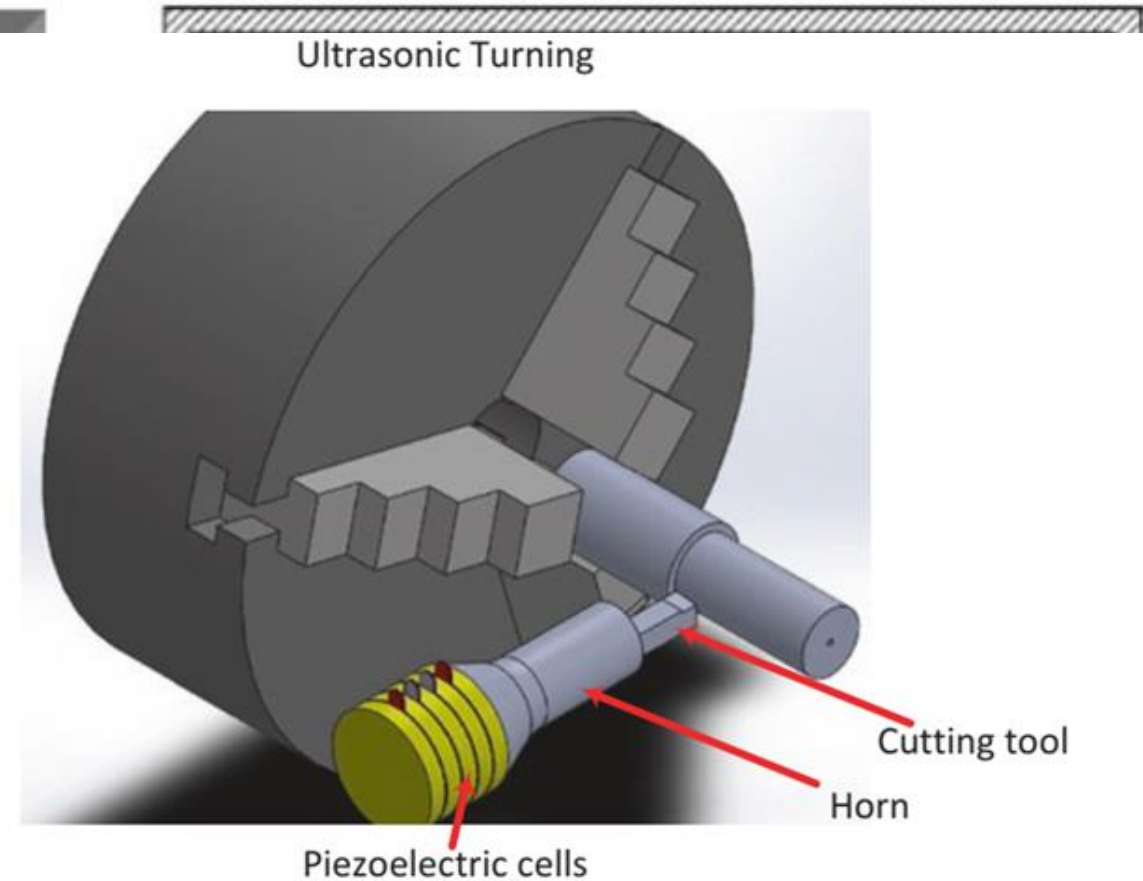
Assisted hybrid manufacturing Ultrasonic Machining (turning)
